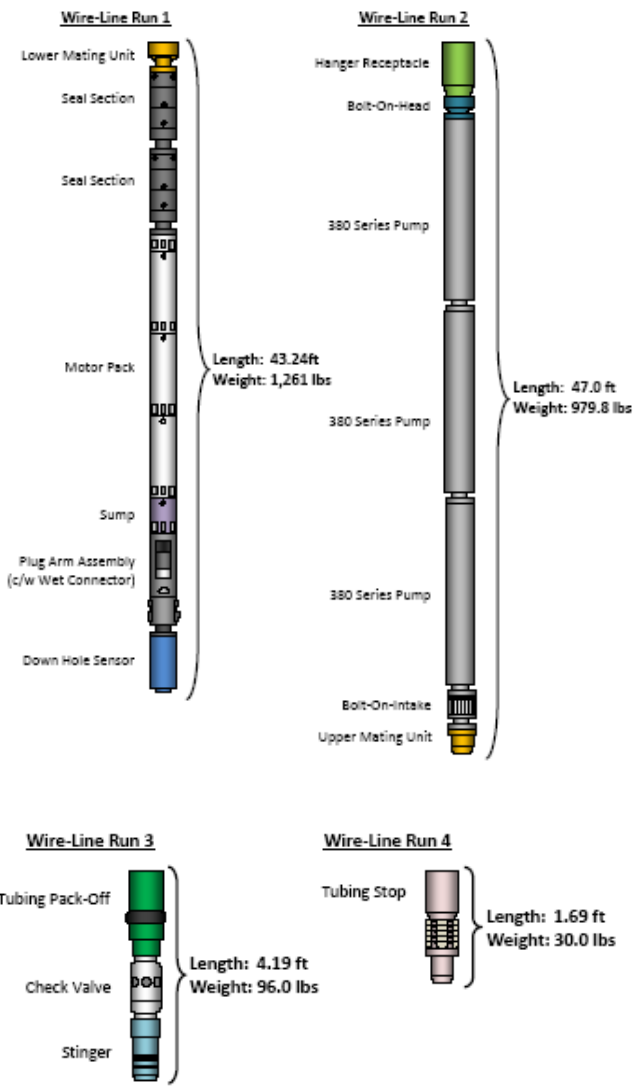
Typical assembly compositions for wireline runs (note, length of wire-line components can be longer depending on lubricator and wire-line tool string lengths)
